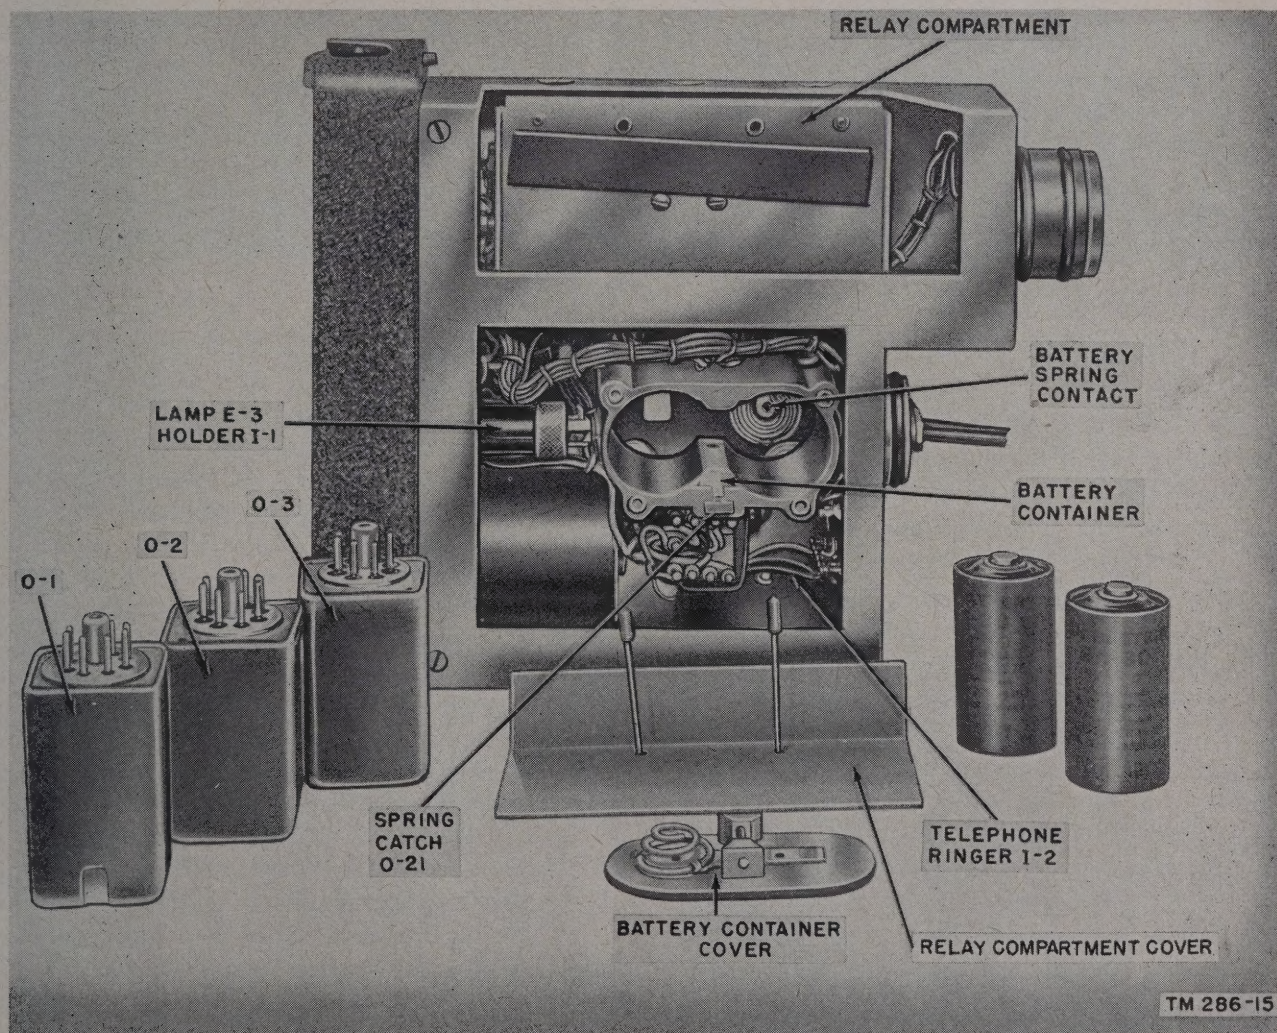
Local Control C-434/GRC, bottom view of chassis.
